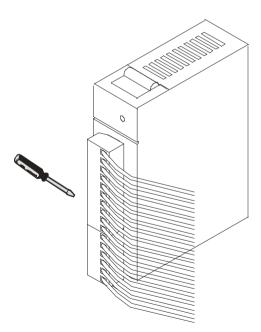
ADAM-5000 I/O Module Terminal Block wiring
